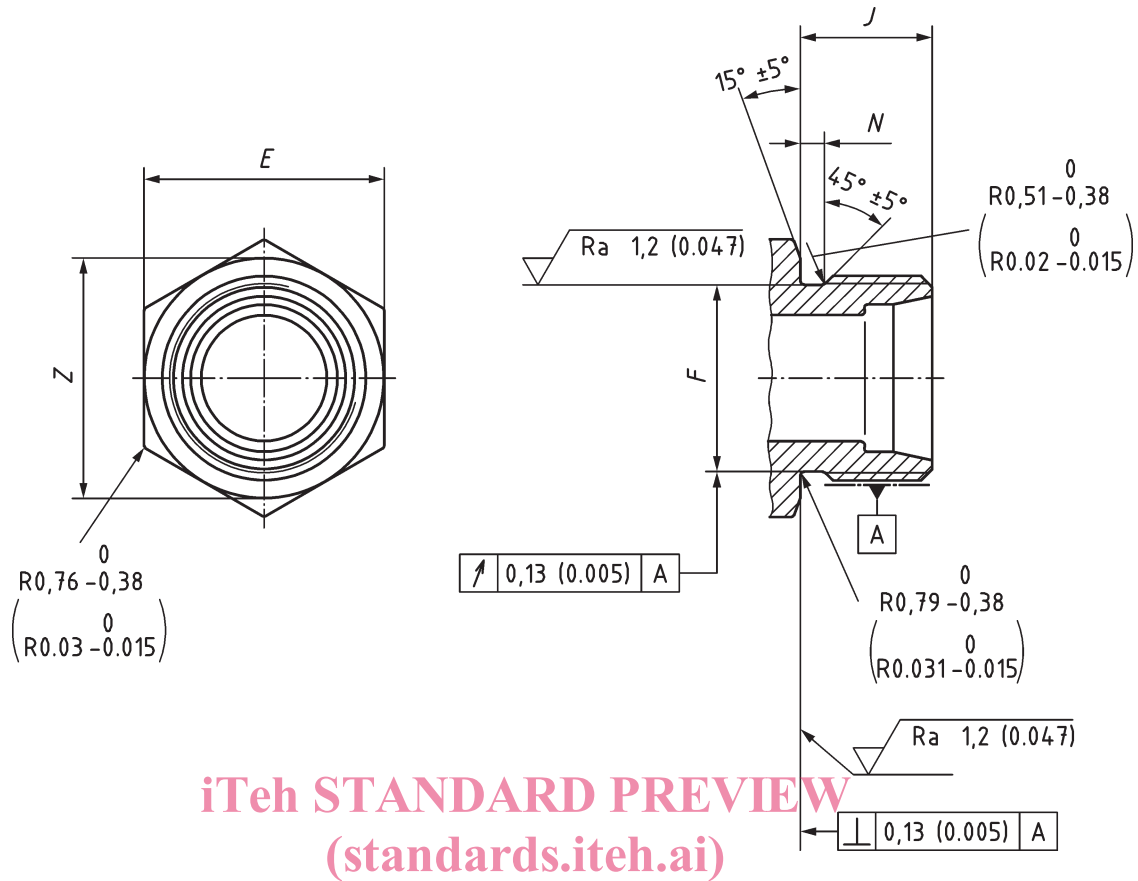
Configuration, dimensions and tolerances of fitting end design, style B (same as style G except as shown)
